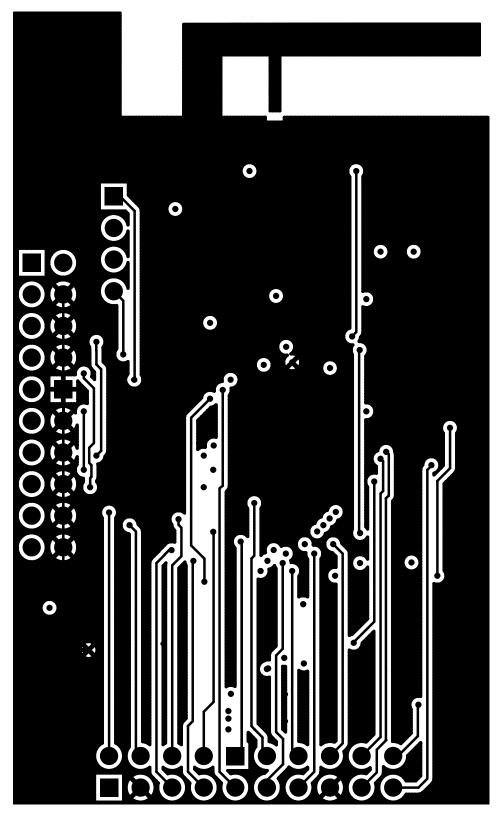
1322x Extended Range Board PCB Layout (Bottom View)
